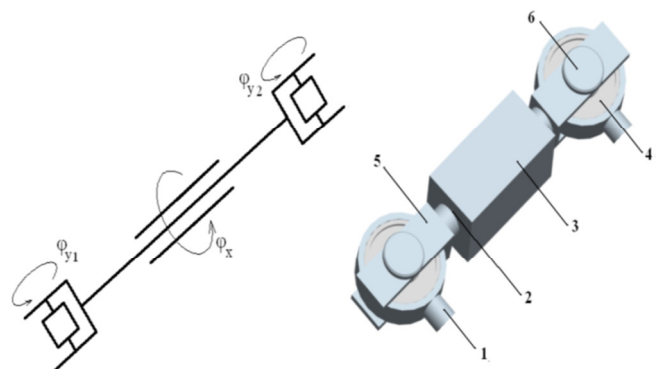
Kinematic diagram and model of the universal joint: 1 – driven arm, 2 – sliding bearing, 3 – bearing arrangement, 4 – ball bearing, 5 – fork, 6 – retaining pin.
